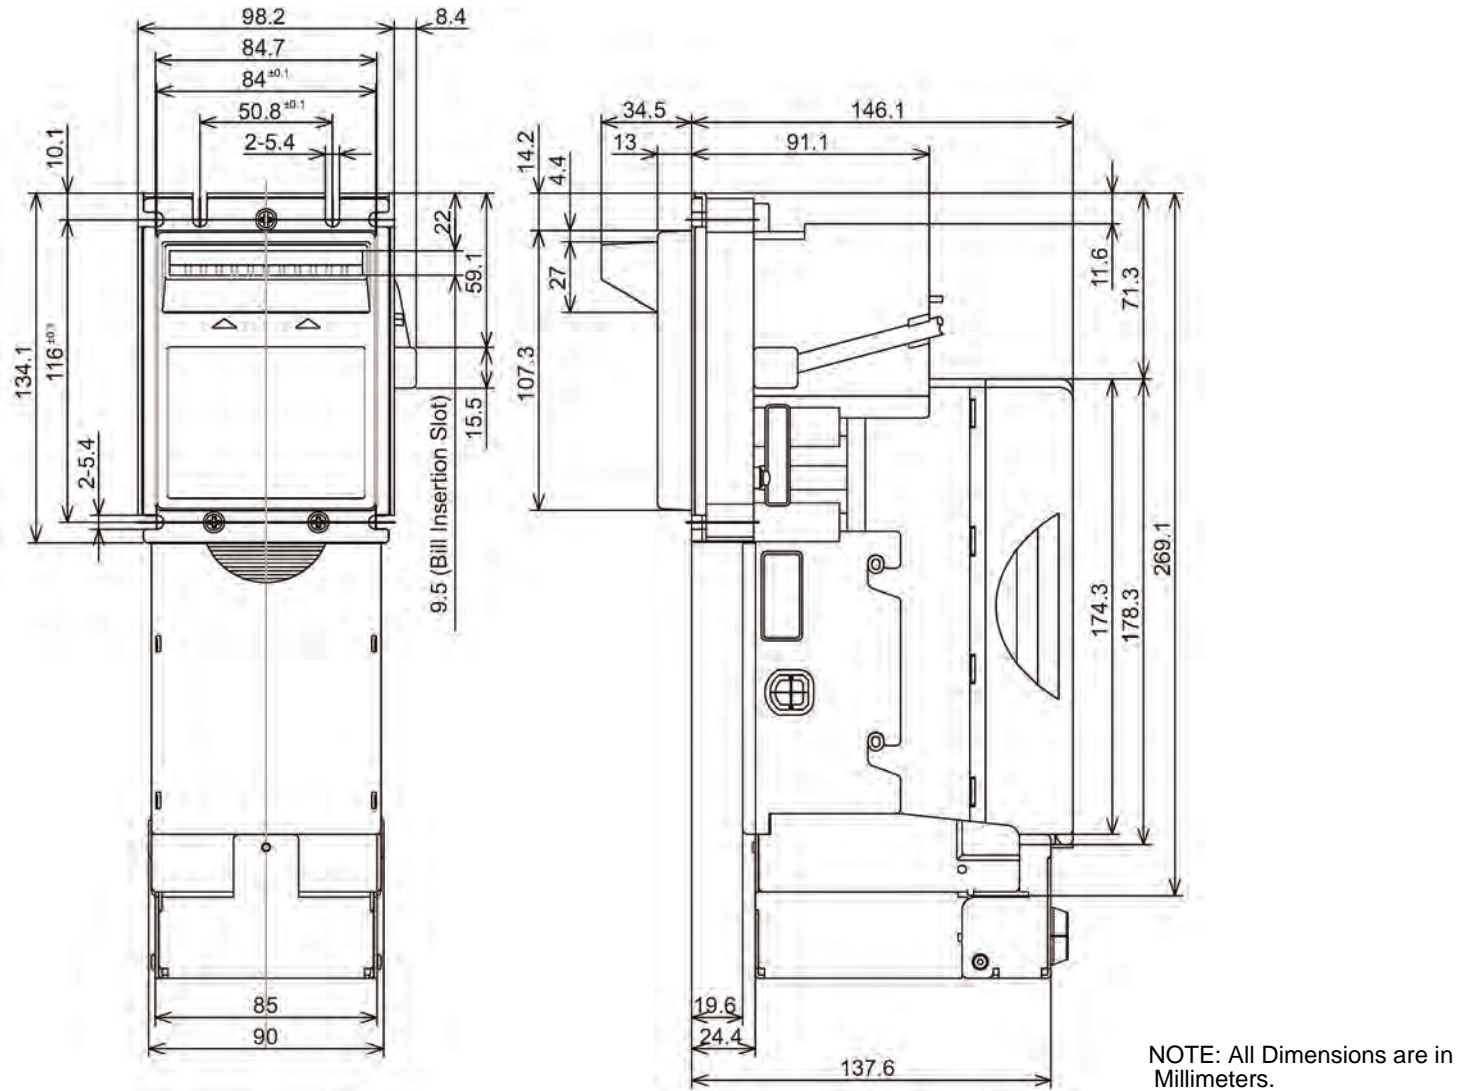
DBV-30X -SD Bill Validator Dimensions with a Type “B” Note Cash Box & Lock Assembly (Part 6)
